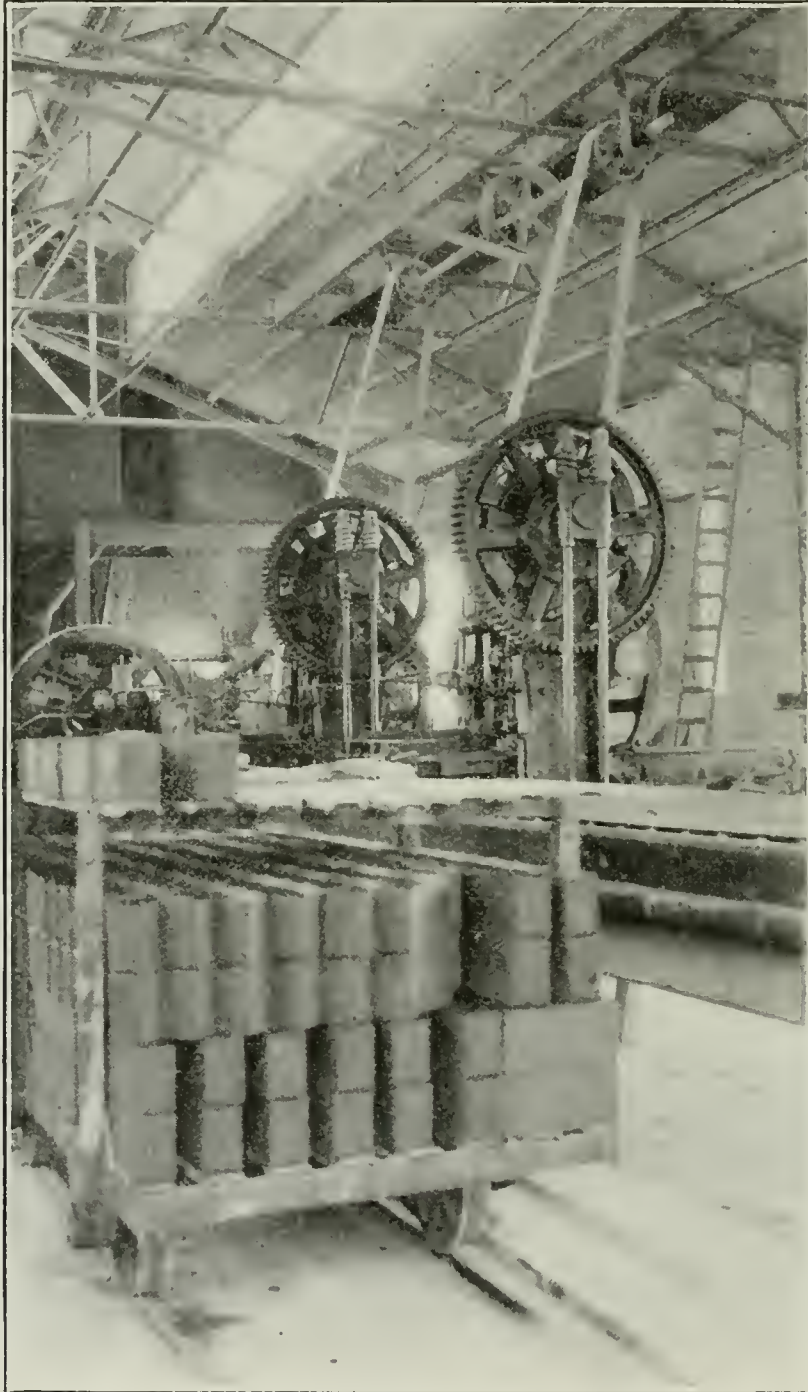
Los Angeles Brick Company, Alberhill plant, showing drier cars and brick represses. Riverside County.
